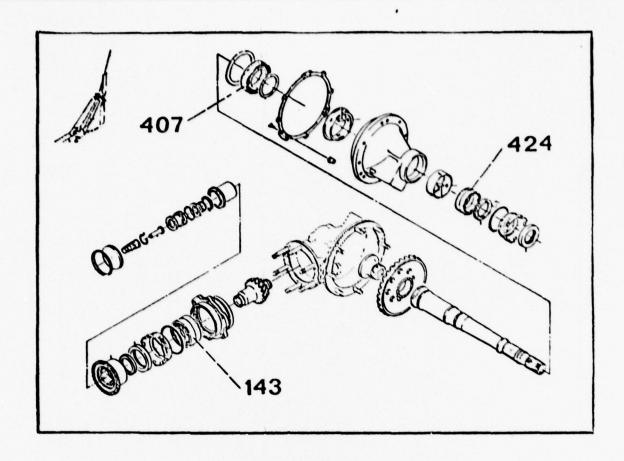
shows an exploded view of this assembly. Figure 11 gives the maximum levels for each baseline run (10 different gear boxes on 4 aircraft), as well as 28 runs from 4 different bearing implants. The mean level of the baseline is 65 with all data within approximately two standard deviations of the mean ( $\mu\pm2\sigma$ ). In all cases, the -143, -406, and -407 bearings gave maximum levels above the mean, although in two cases, the readings were within ( $2\sigma$ ) of the mean baseline. The results for the -424 bearing were not as clear-cut. Four of the nine implants were less than the baseline mean, and an additional two were within ( $2\sigma$ ) of the baseline.
